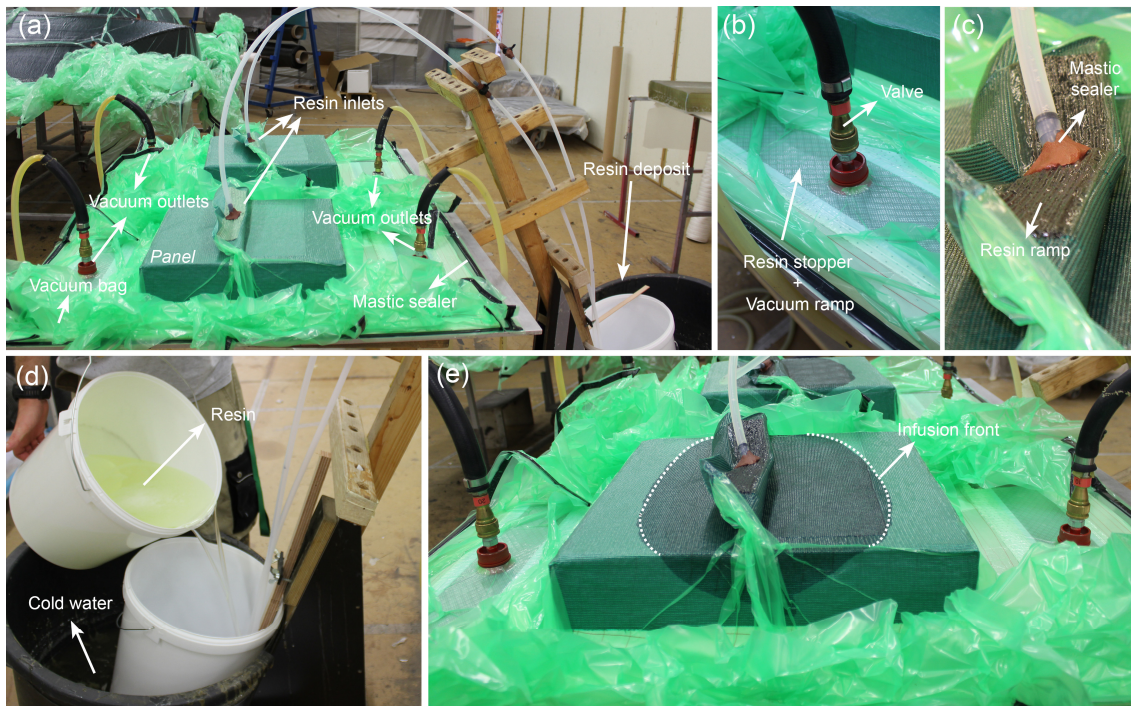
Vacuum infusion set-up; (a) general view of infusion set-up, (b) detail of vacuum outlet, (c) detail of resin inlet, (d) detail of resin deposit and (e) detail of infusion front during resin infusion.
